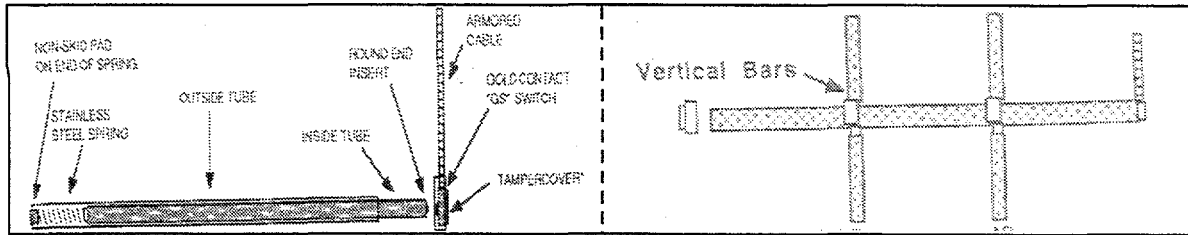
BB-1XL Barrier Bar Pressure Sensor Assembly
